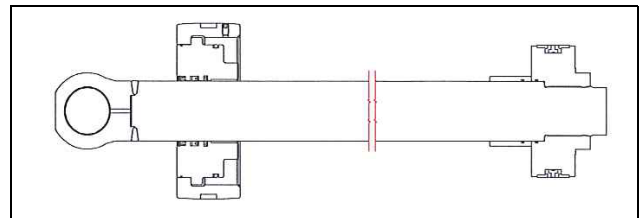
Piston, Head and Barrel Cap Disassembly (Upright Level Cylinder)
